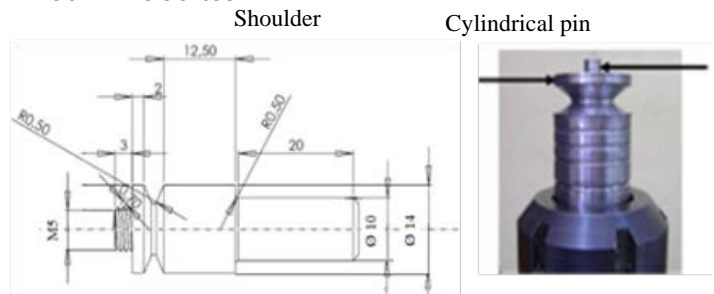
Tool for Friction Stir Spot Welding
